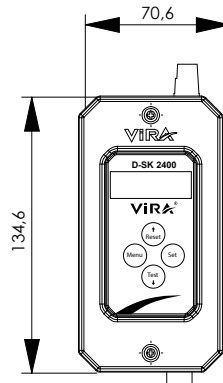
D-SK 2400 Level Controller Dimensions With Panel Mounting Bracket
